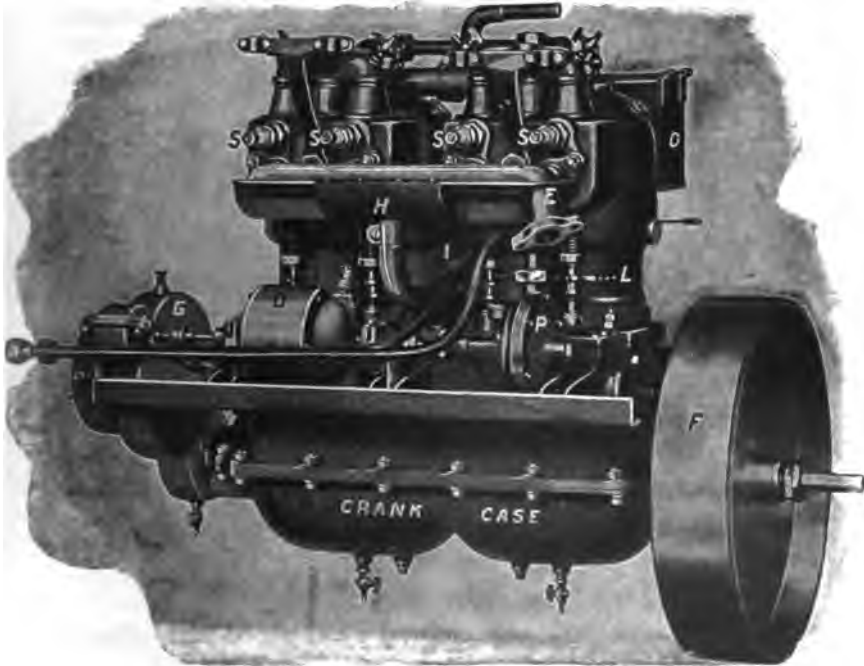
Four-cylinder Motor of the Locomobile Carriage. D, dynamo; E, exhaust pipe; F, flywheel; G, governor; H, air heater for carburetter; L, lug on cylinder wall, as fulcrum for tool in removing exhaust valves; P, centrifugal pump; O, oil tank; S, S, S, S, spark plugs.
